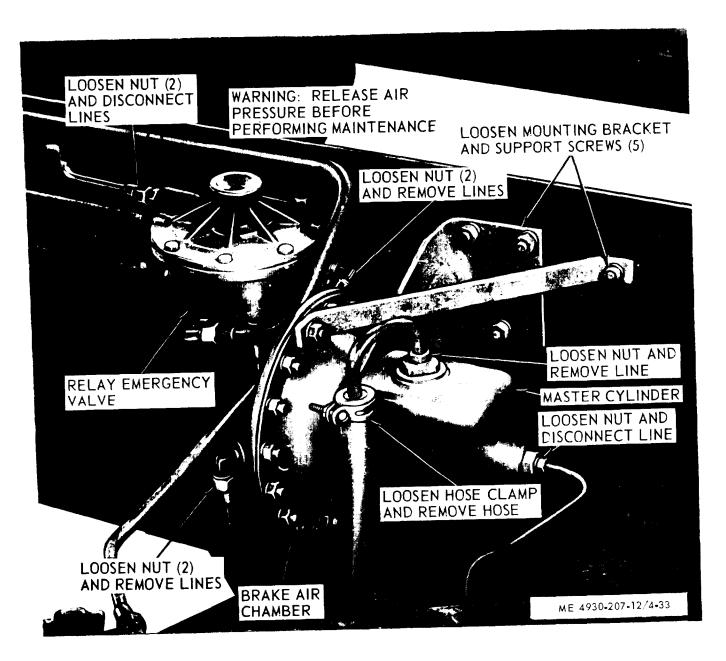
Hydraulic master cylinder, brake chamber and relay valve, removal and installation.
